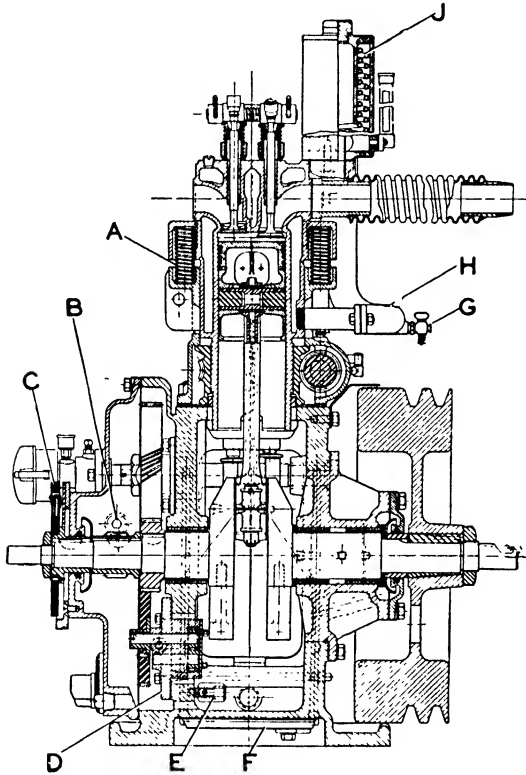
SECTIONAL VIEW OF C.F.R.-A.S.T.M. ENGINE.
